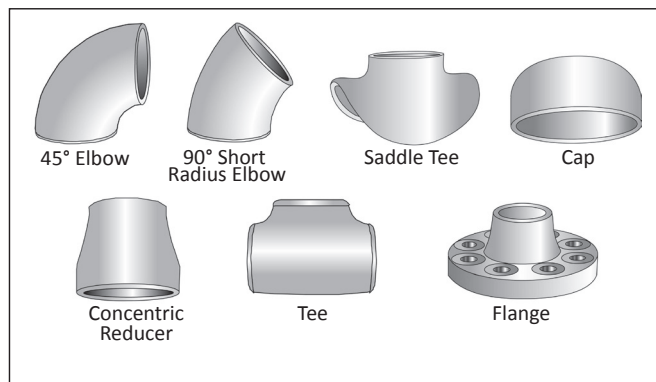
Examples of Various Pipe Weld Fittings
